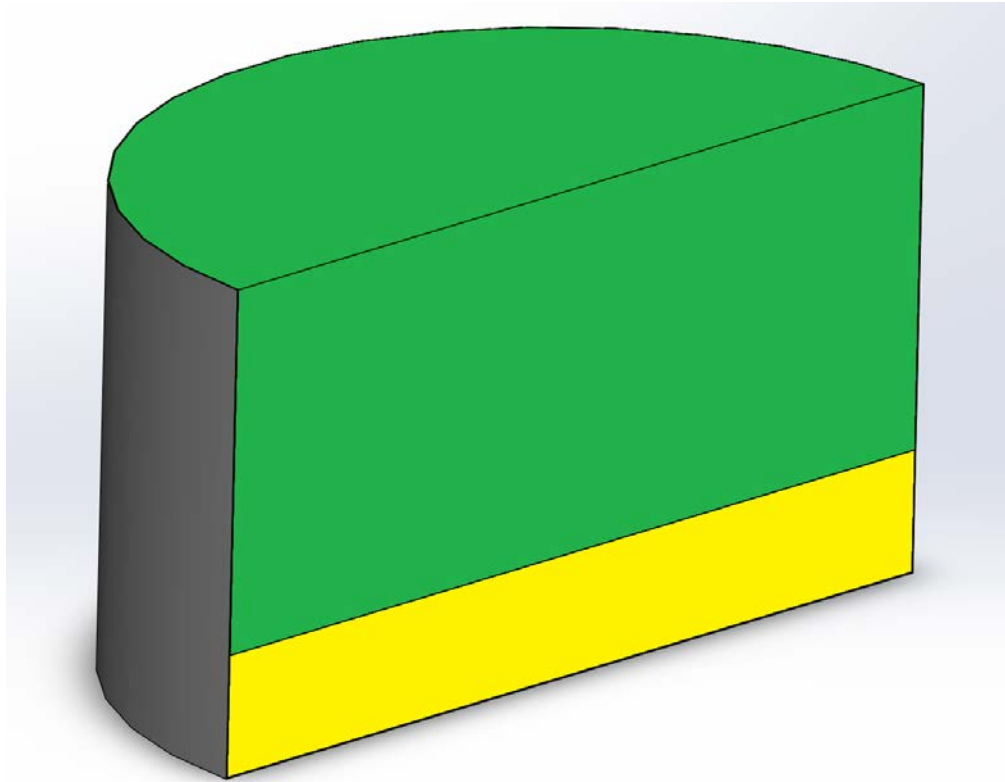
Cross-sectional view through the center of the canister assembly geometry.
